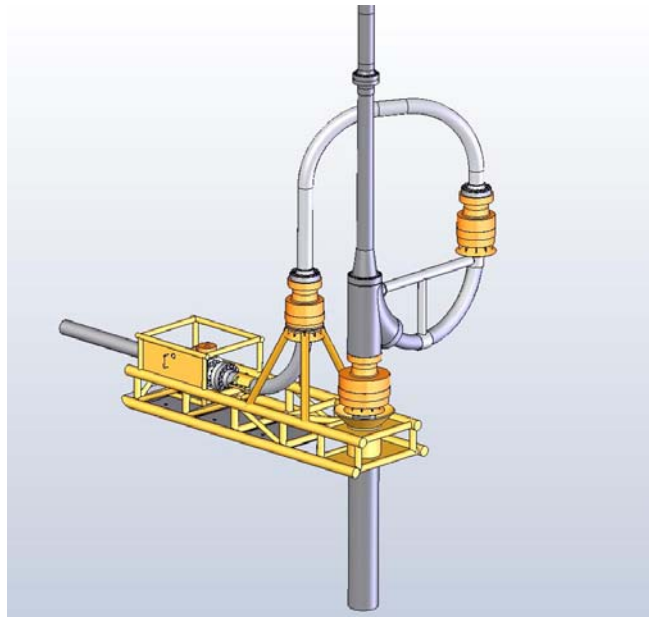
SLOR Bottom Assembly Using a 36in Pile
